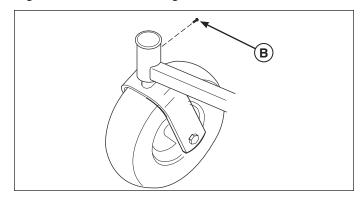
Front Caster & Wheel A. 1/4-28 Bolt
